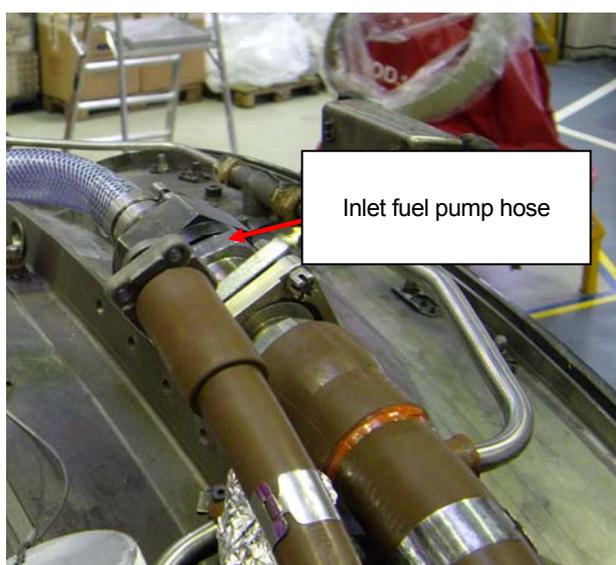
Possible inlet fuel connection point CFM56-5A
